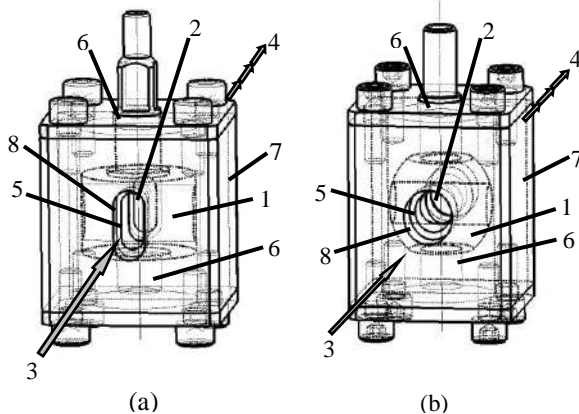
Optical choppers with rotational shafts [9]: (a) cylindrical with slits; (b) spherical with holes. Notations: 1, shaft; 2, slit; 3, incident laser beam; 4, emergent laser beam; 5, slot or hole; 6, bearings; 7, 8, cage.
